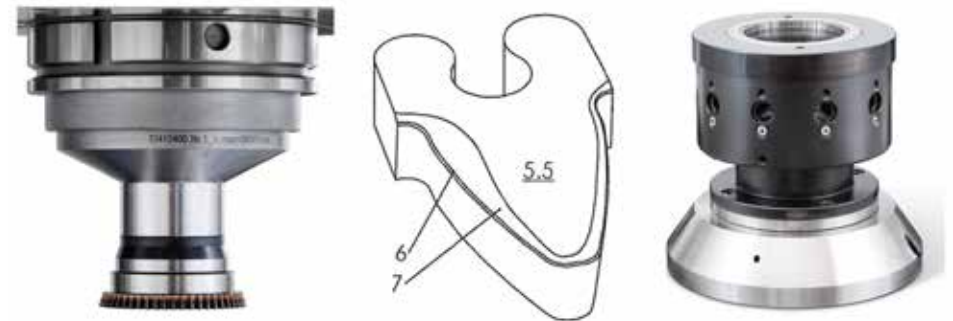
Tool system, possible tool microgeometry and mechanical clamping device exemplary.
